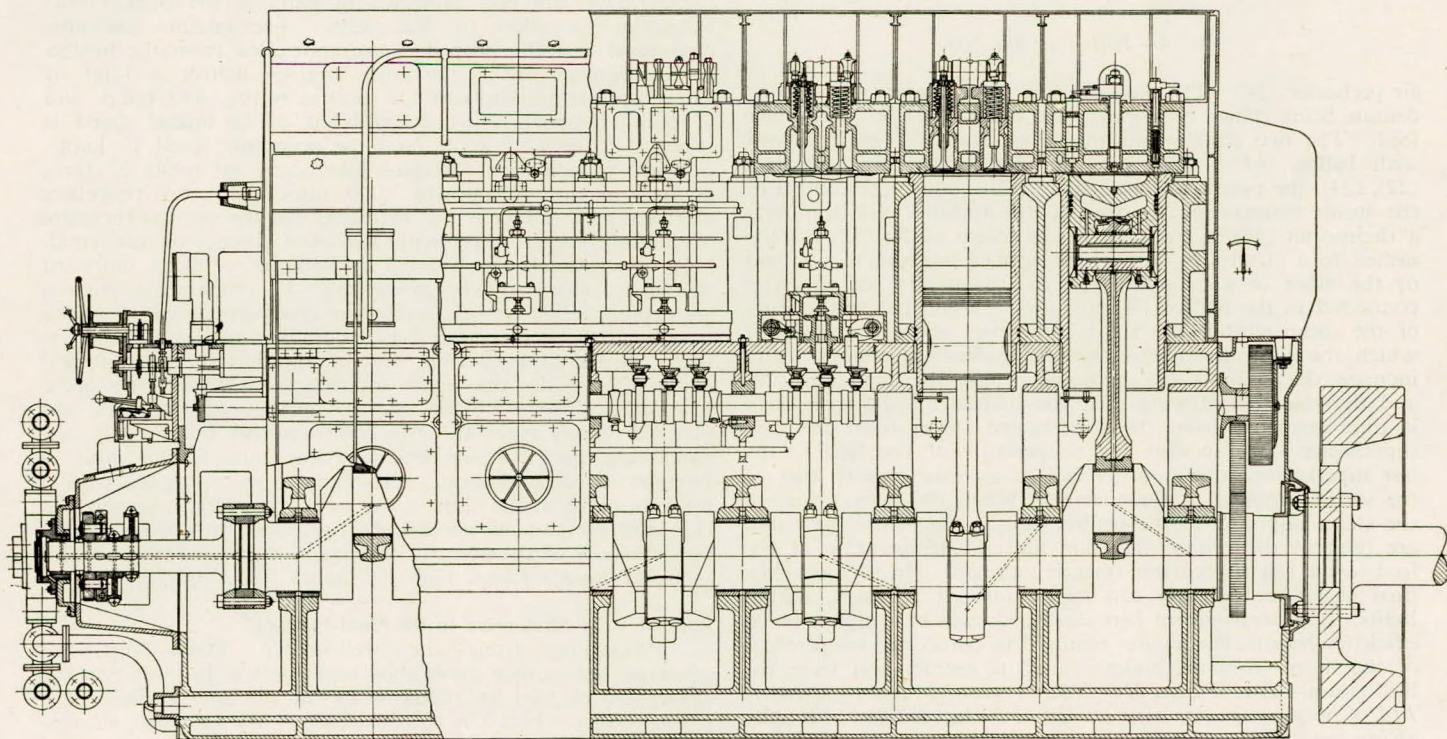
Longitudinal section through a six-cylinder supercharged engine
